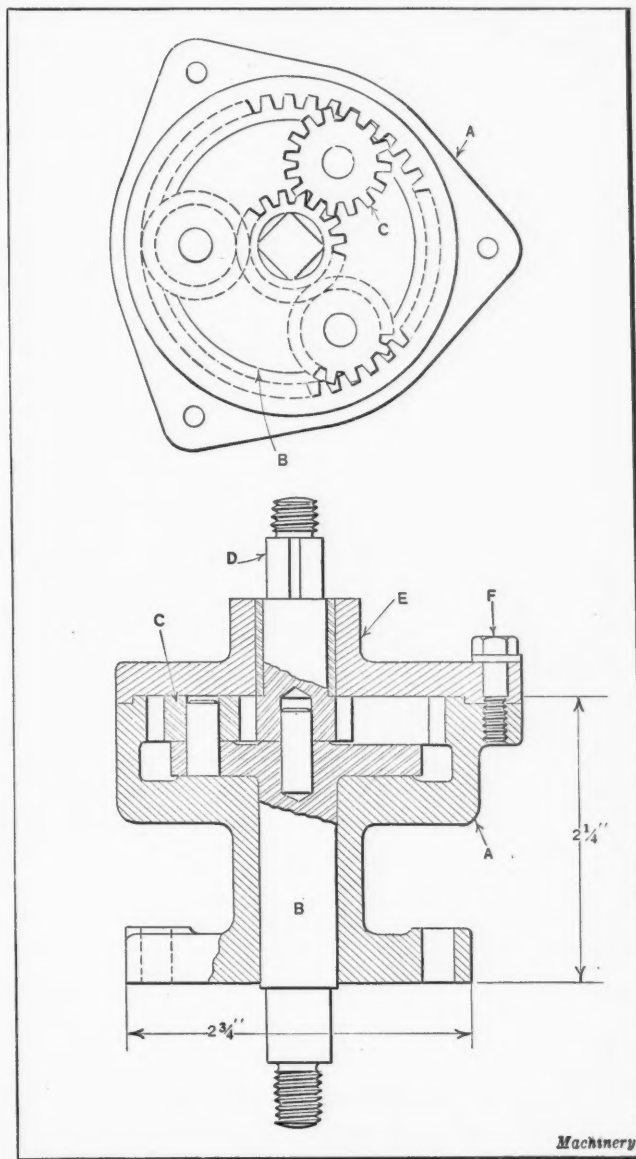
Sectional View of a Triple Gear Unit which was assembled by Means of a Power Conveyor
